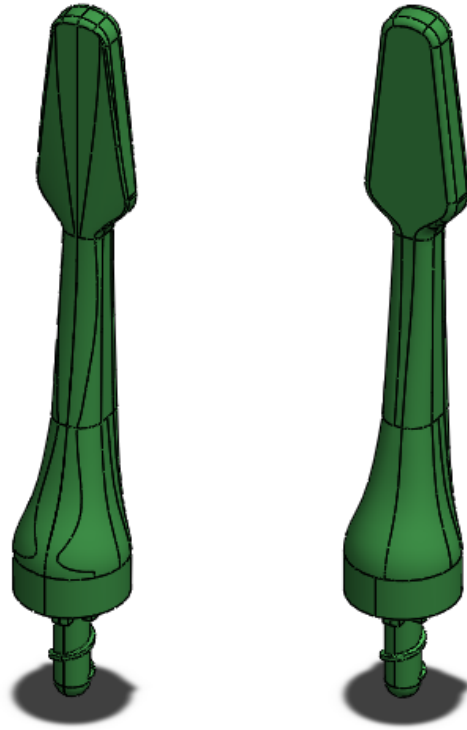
CAD geometry for the injection moulded prototype to the left and accurate CAD geometry for the toothbrush head to the right.
